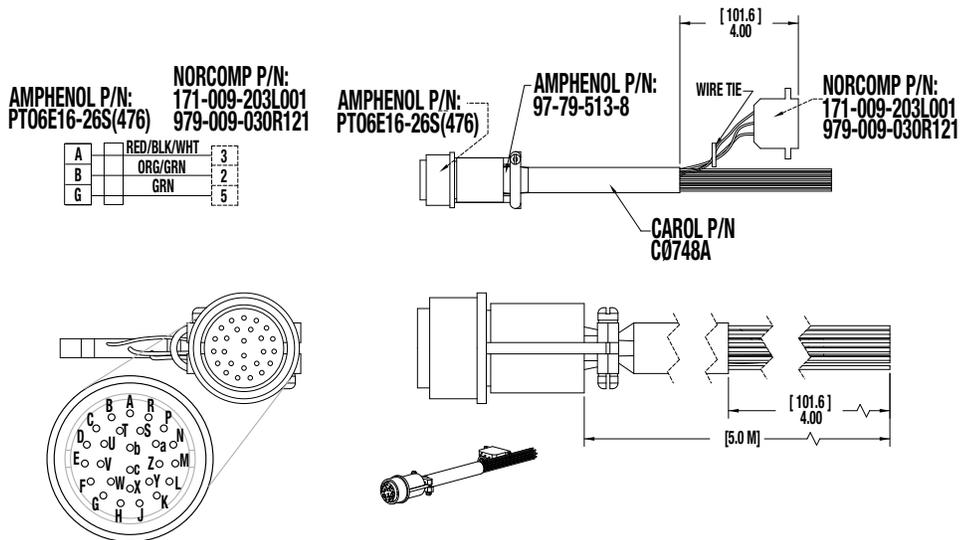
ICR SV1B Basic Actuator IP65 I/O Cable 3604-1648
